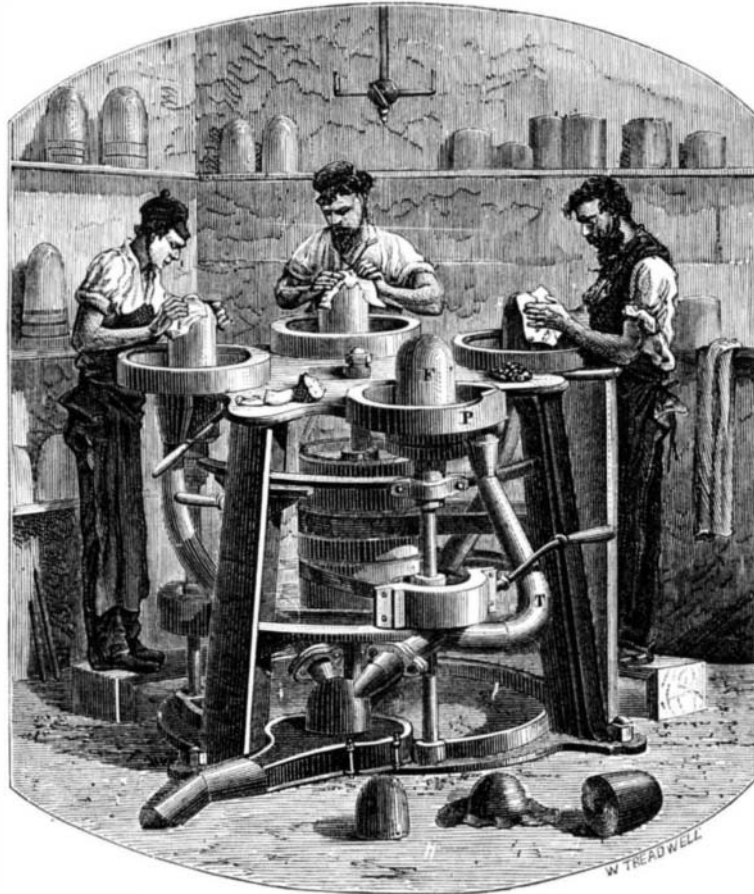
HAT MOLDING AND SHAPING MACHINERY.
